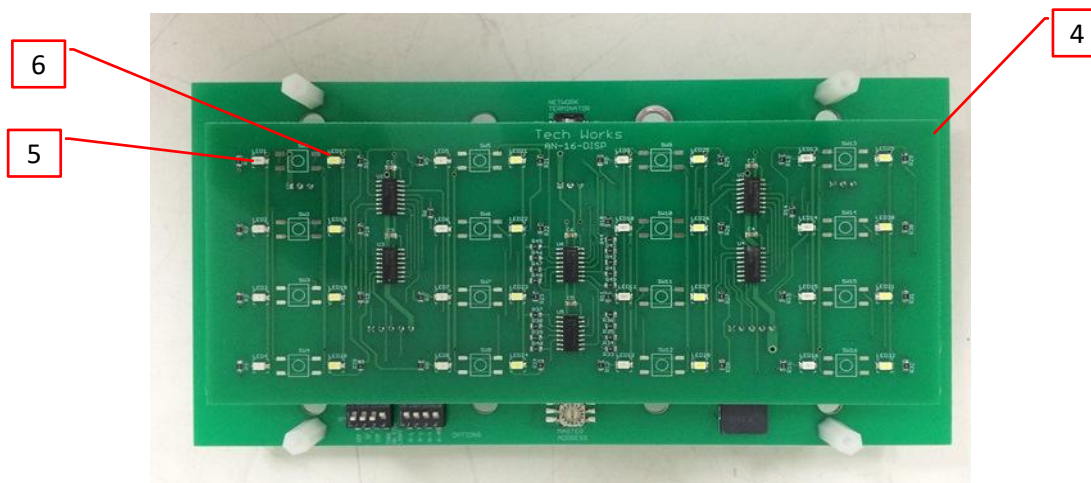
Internal view of Model NC-AN-16C-T - PCB - Side 1
